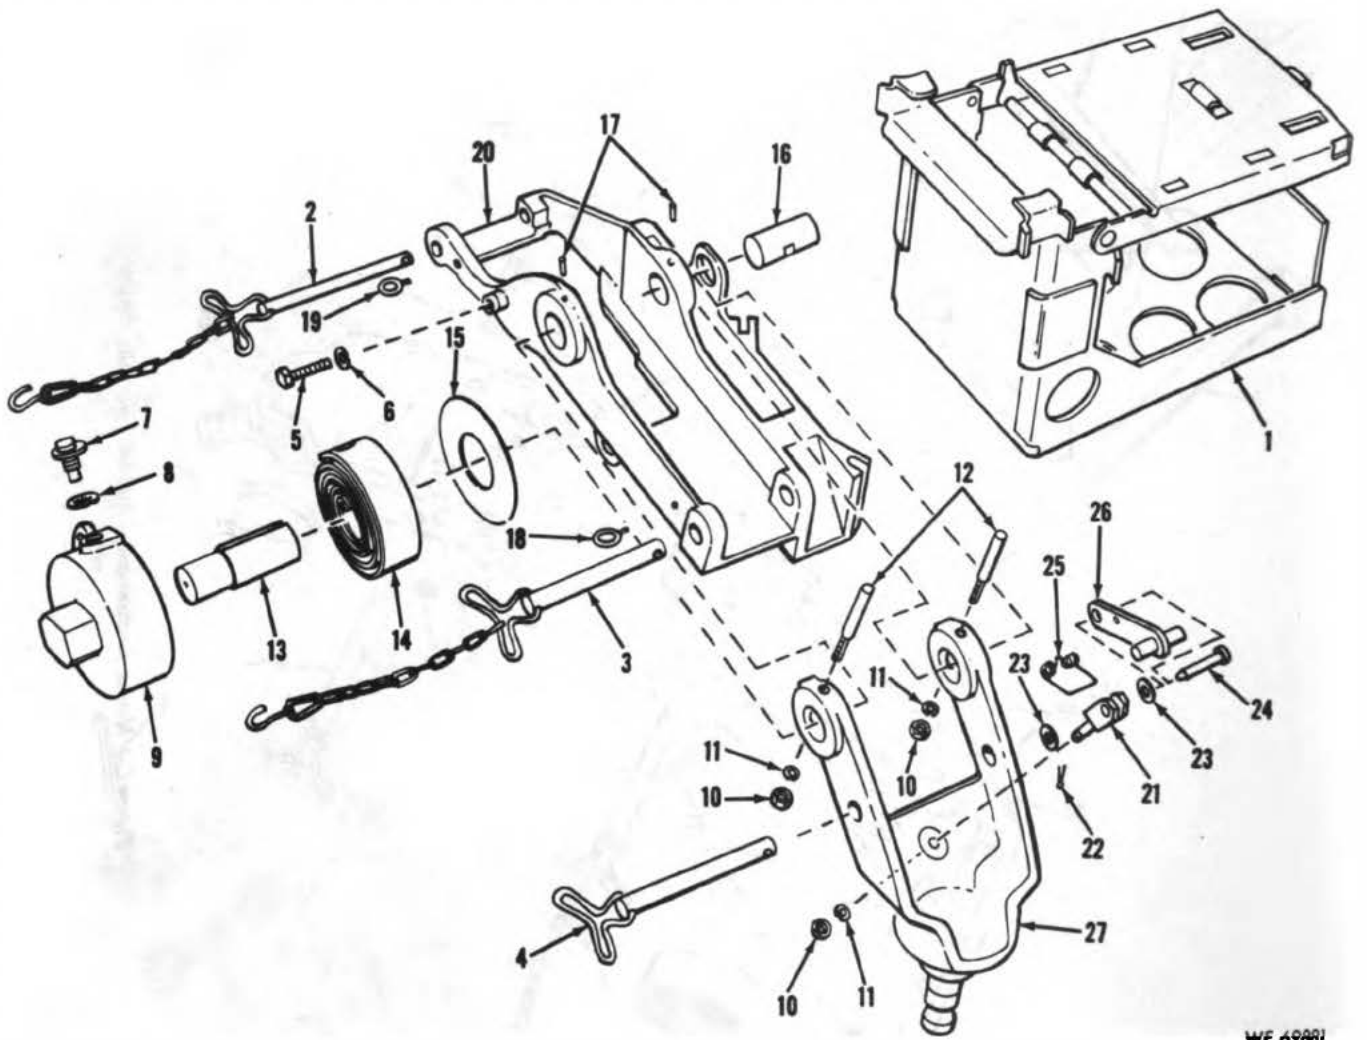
Mount, machine gun—7046650—partially exploded view.
